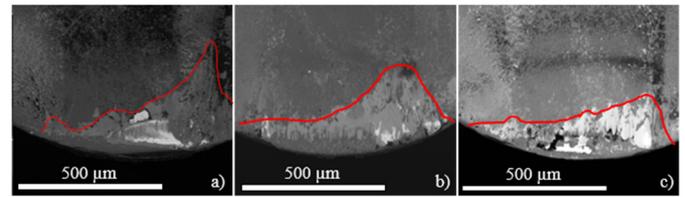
Tool wear (a) dry; (b) MQCL oil; (c) MQCL oil-GnP.
